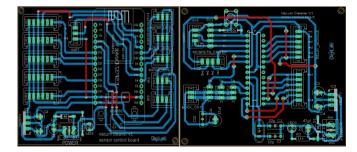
(a) esp32 vacuum board, (b) Avr vacuum board
